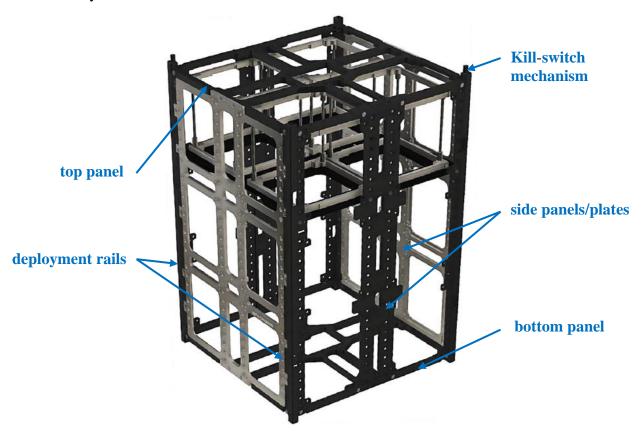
Typical 12U CubeSat structural frame [12]
